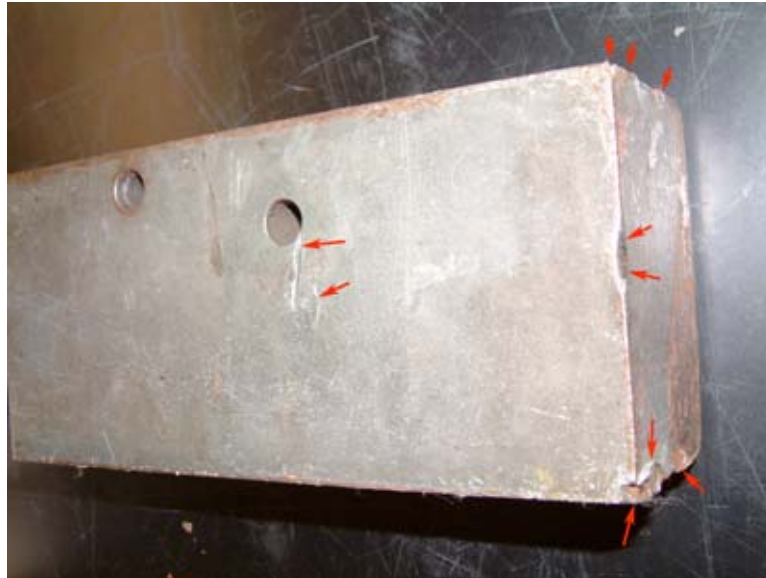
Bottom surface of the metal block of the head assembly with indentation marks
